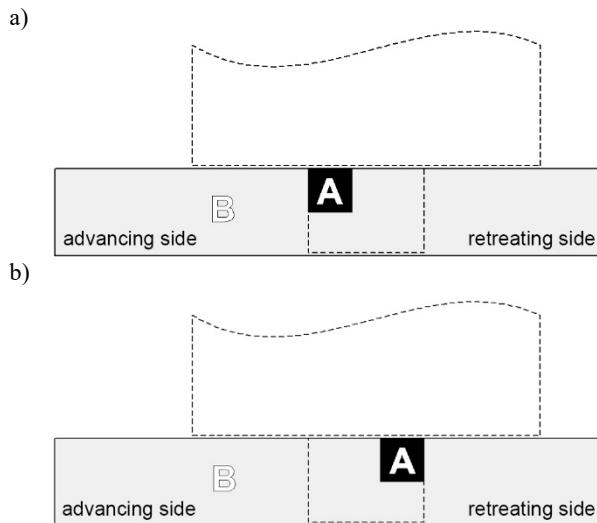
Diagram of location of the rod of EN AC-43200 alloy (A) in the material of EN AW-6082 alloy (B) before welding with FSW process, a) from the advancing side; b) from the retreating side
